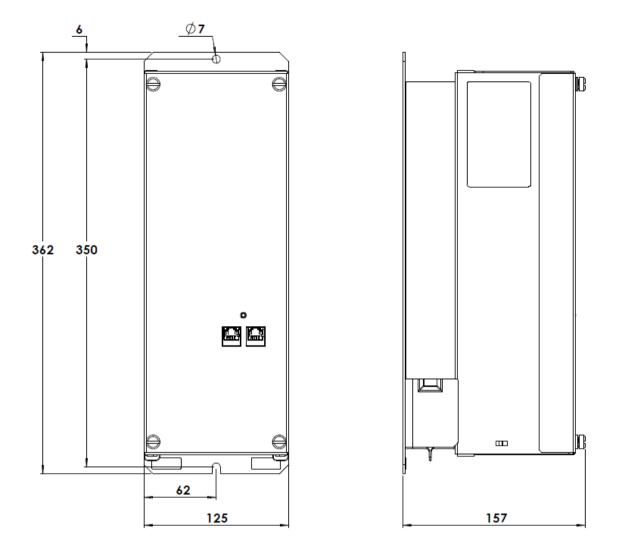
15kW and 24kW PIU dimensions Wall mount
